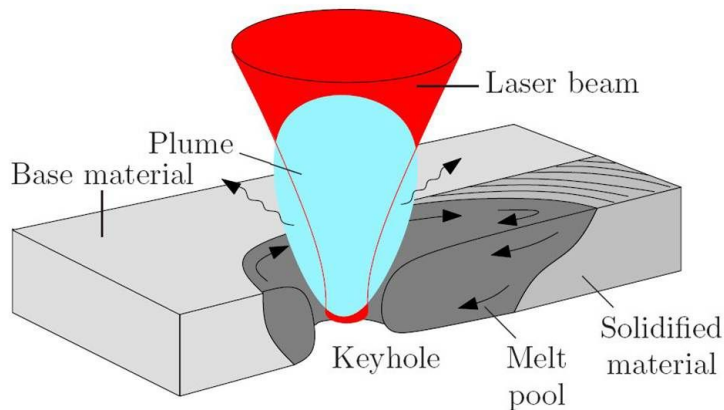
Schematic cross section of the Full Penetration Keyhole Laser Welding process of a Thin Sheet
